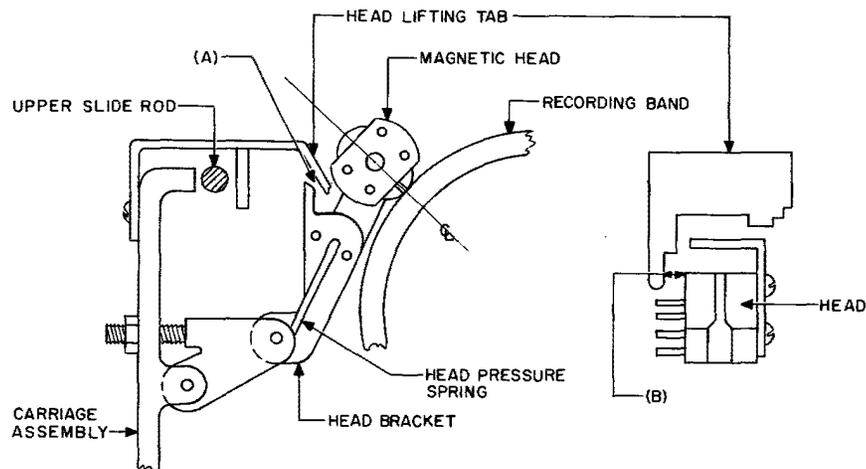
Upper Slide Rod Details (Head in Recording Position)
